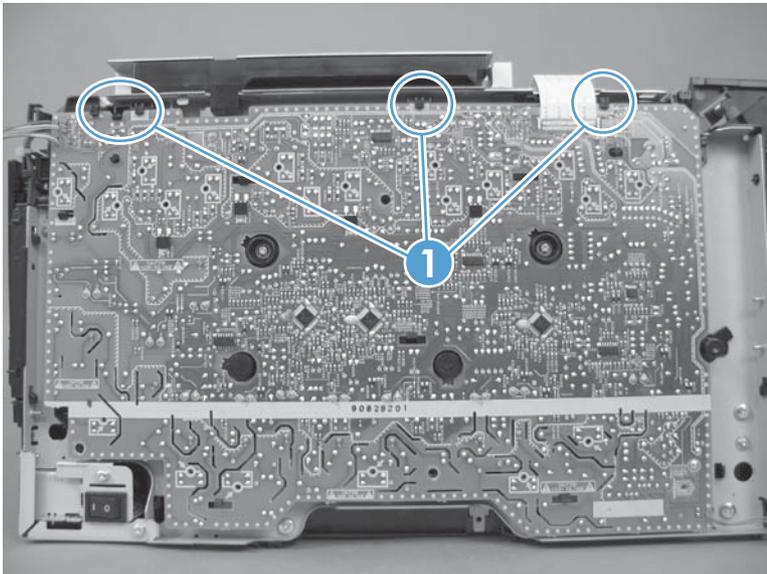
Remove the power supply (high-voltage; 6 of 6)
